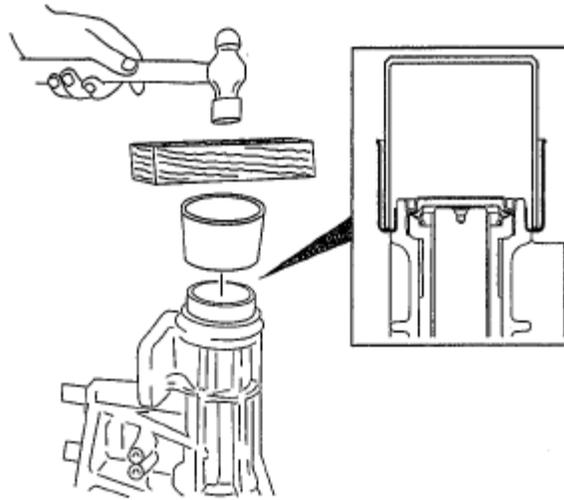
Position For Installing Extension Housing Shroud To Extension Housing
